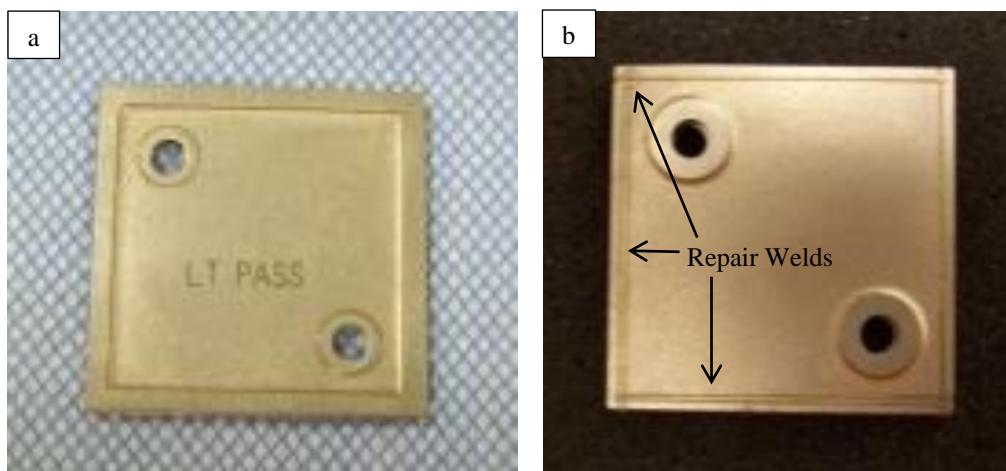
Examples of successful header (a) and flange (b) welds. Repair welds can be seen on the flange weld sample.
